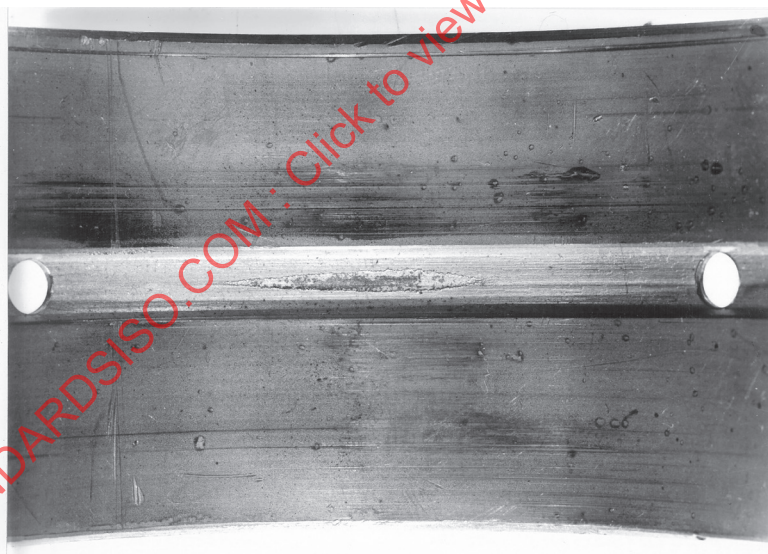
Discharge cavitation erosion in a groove of the lower half main bearing of a petrol engine
